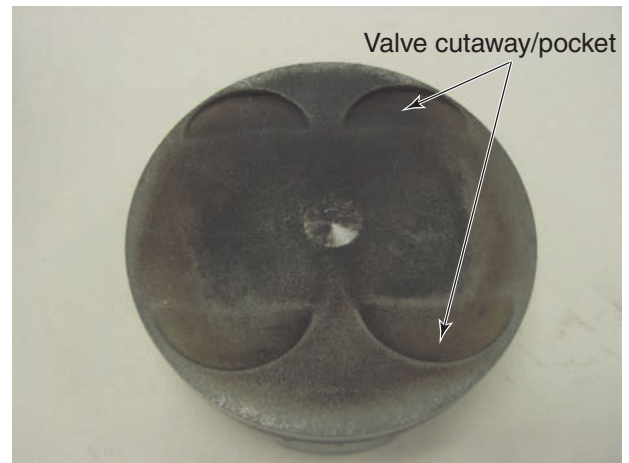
Cutaways are used to prevent piston-to-valve contact under normal engine use.
